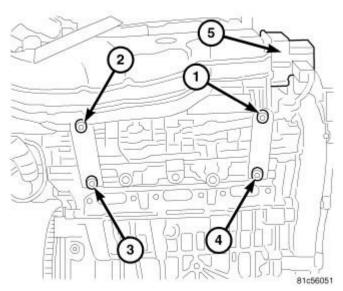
Manifold Tuning Valve, Short Runner Valve, Throttle Position Sensor & Manifold Absolute Pressure
